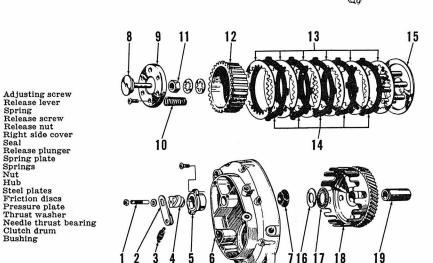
Exploded view of the clutch assembly. Hub (12) is splined to the transmission input shaft. The later type is shown, but early models are similar.
